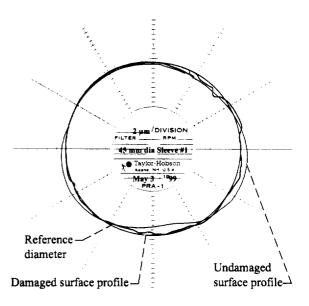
Measured profile at both edges of the bearing sleeve inner diameter after tests were completed.
